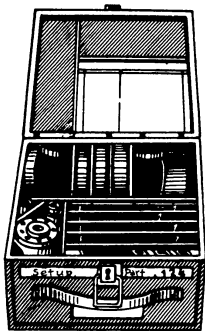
Box with Set of Tools for Setting up a Machine Tool to Process a Definite Part
